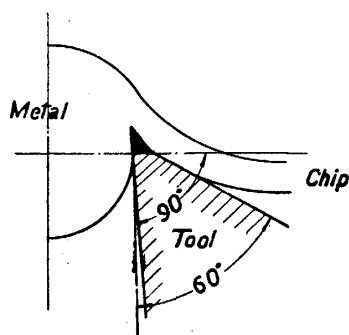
The Built-up Edge on the Flattened Edge Tool.
